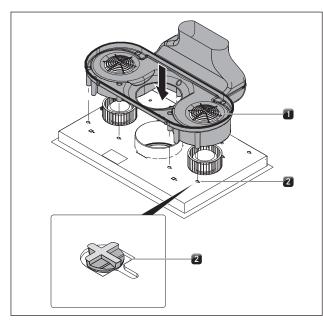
Inserting the airflow assembly on the cooktop base
